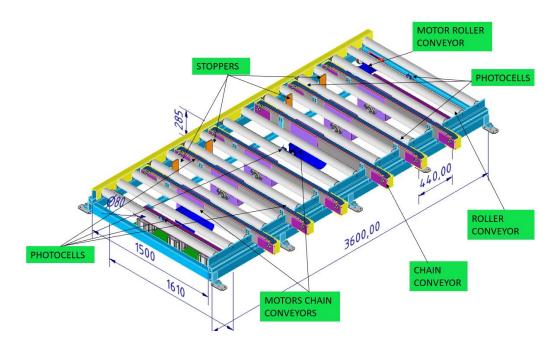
First roller chain conveyor that transports pallets. Dimensions in mm.
